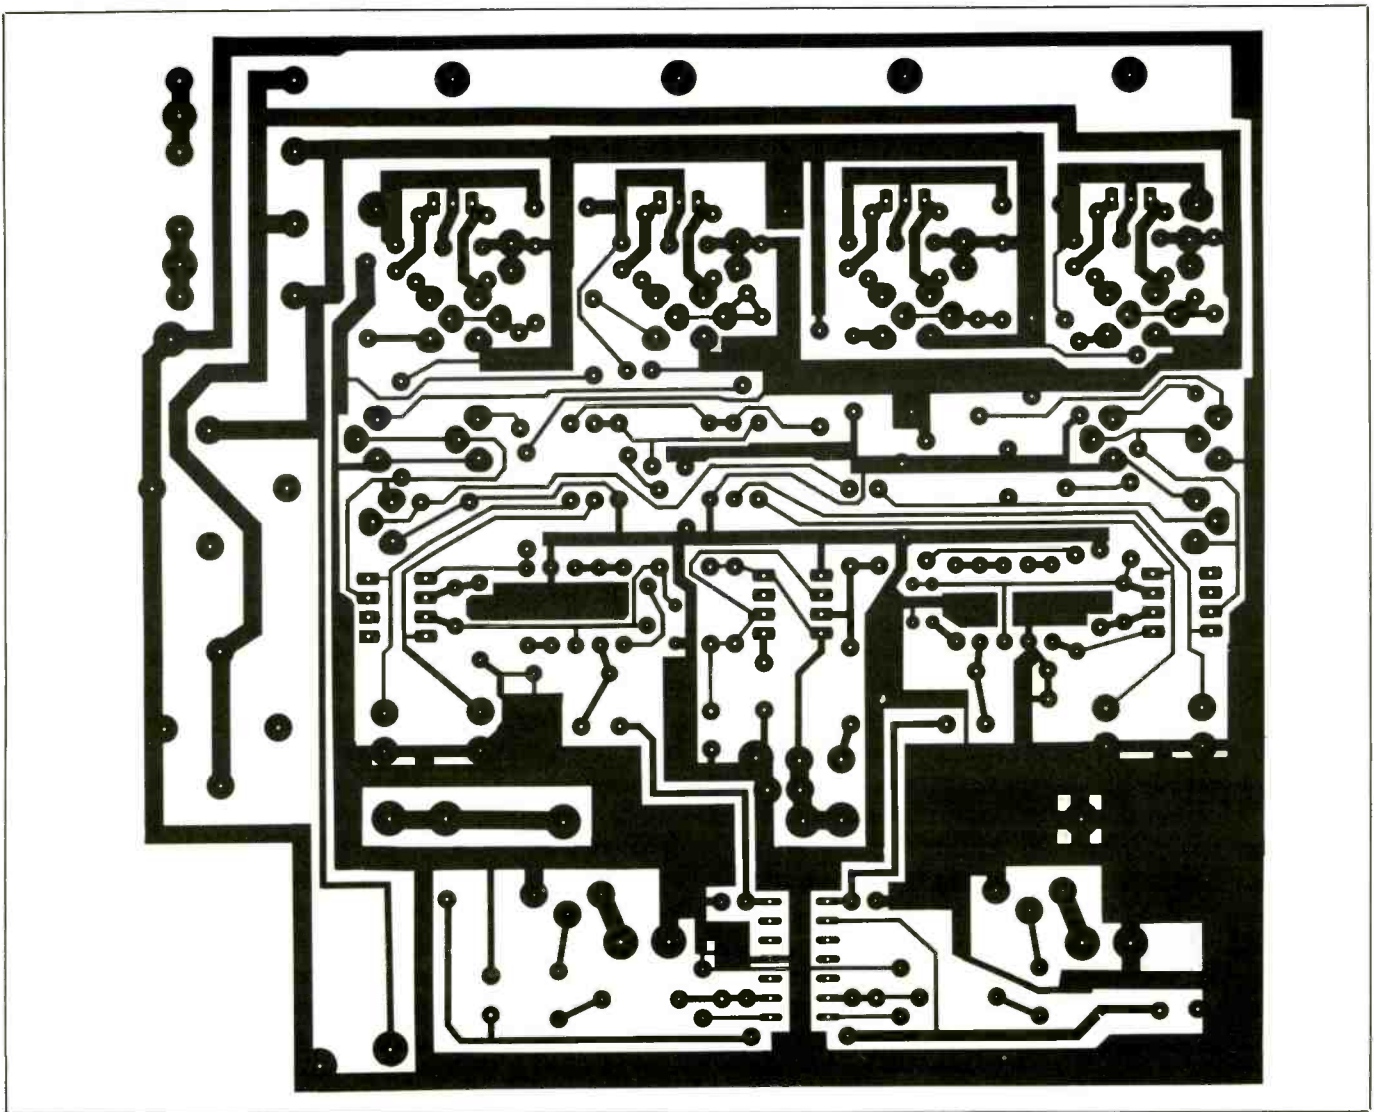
The actual-size etching-and-drilling guide for the printed-circuit board on which the amplifier circuitry is wired. With just a few wire jumpers (J), the complex circuit wires neatly on a single-sided board.
